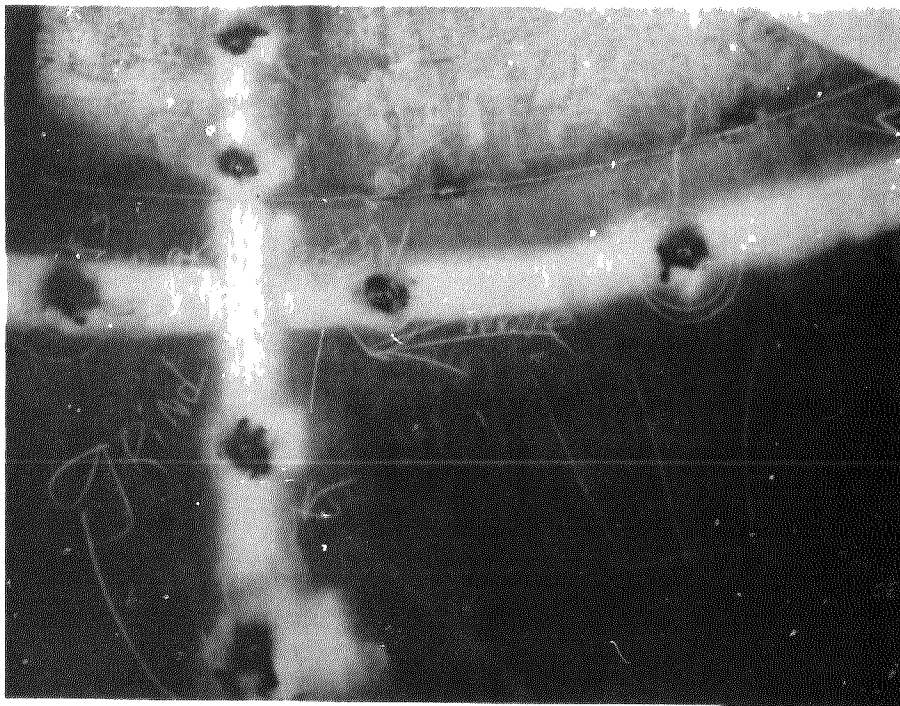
Welded Nuts For Anchor Bolts
